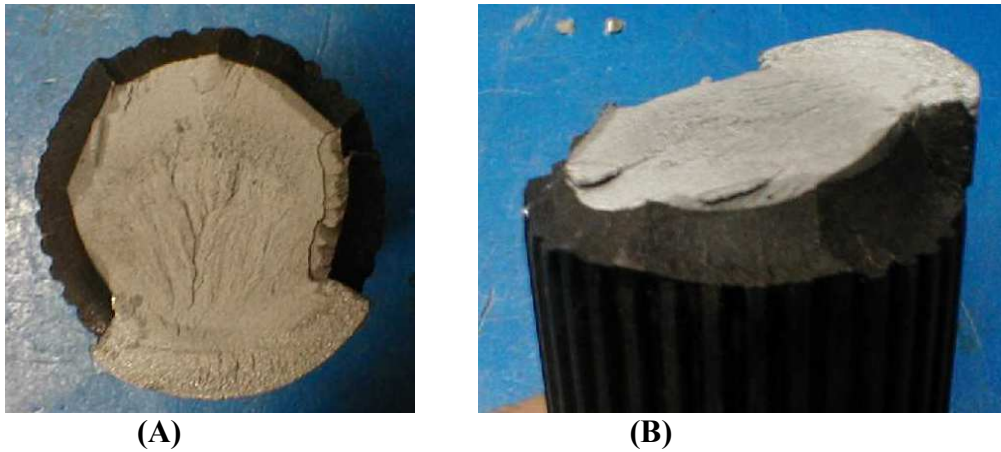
(A) General view of the cardan yoke fracture surface, showing a dark ring-shaped nail, indicating a pre-existing crack. (B) Lateral view of the cardan yoke fracture surface.
